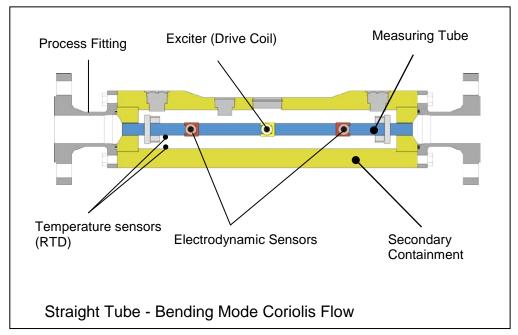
Key Components of a Straight Tube - Bending Mode Configuration
